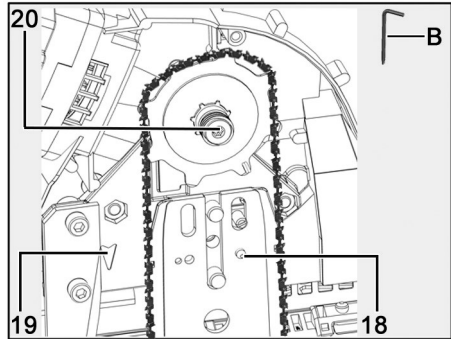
Mounting a guide bar with new / freshly sharpened saw chain
